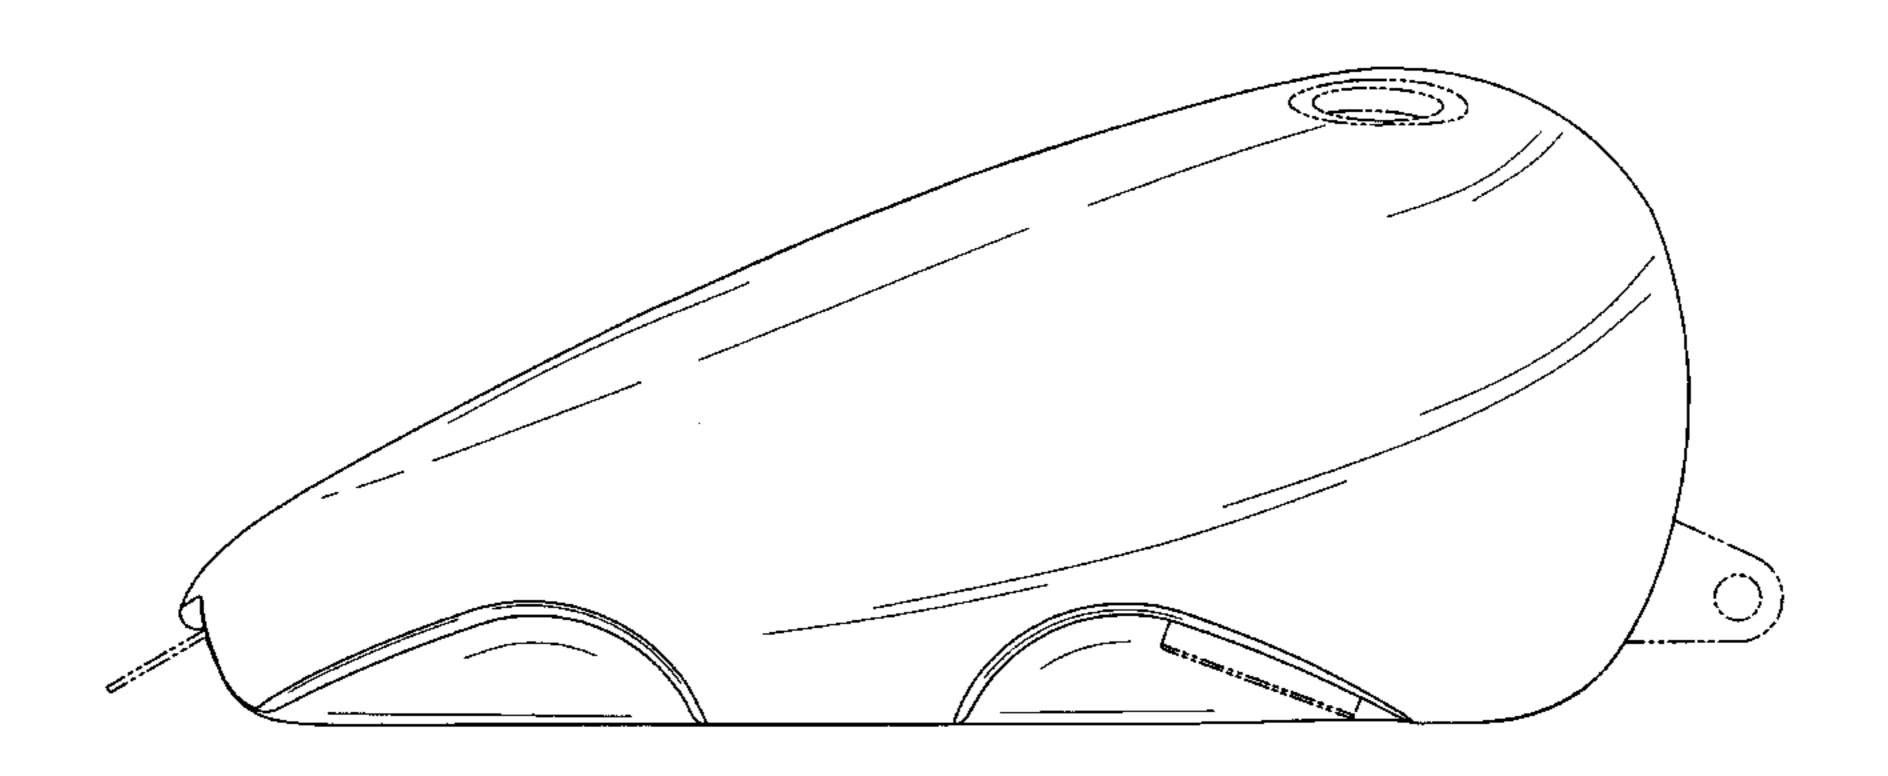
a left side view of the motorcycle tank of FIG. 1.
